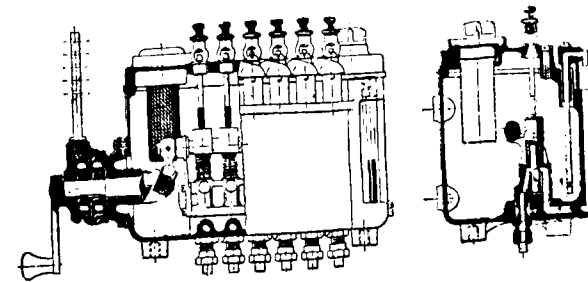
Sectional drawing of the D.S.I. Lubricator.
